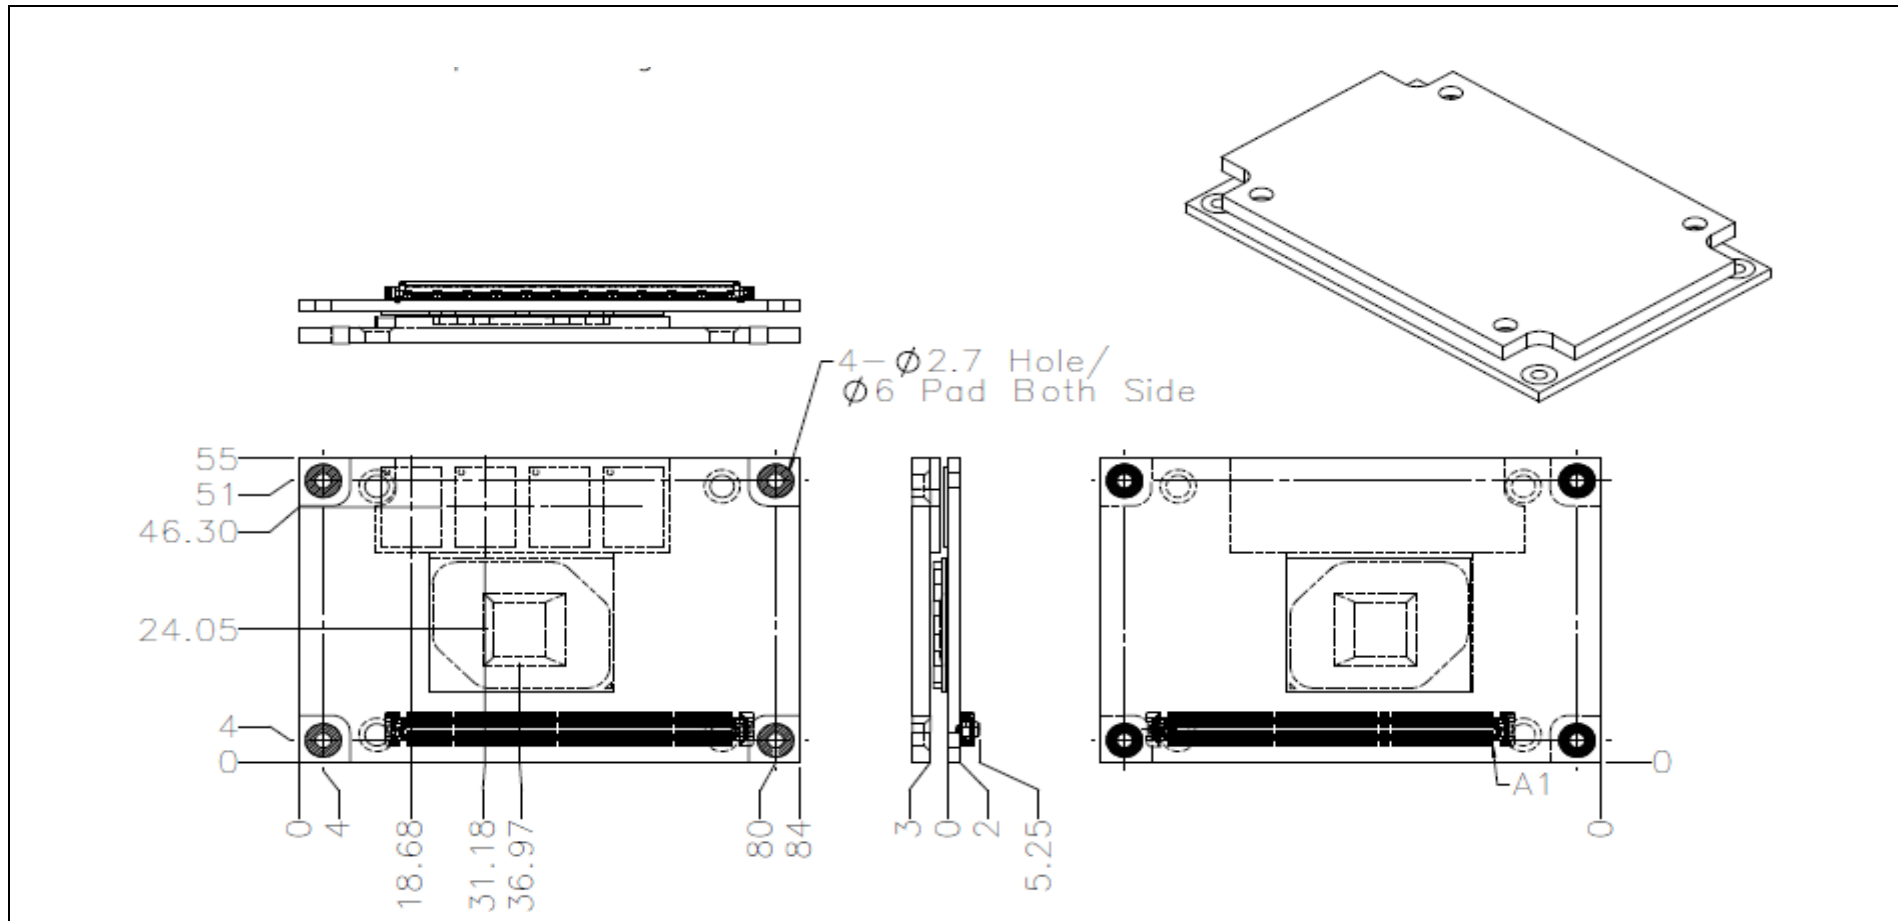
Mechanical Dimensions with Heat Spreader - Top/Bottom
